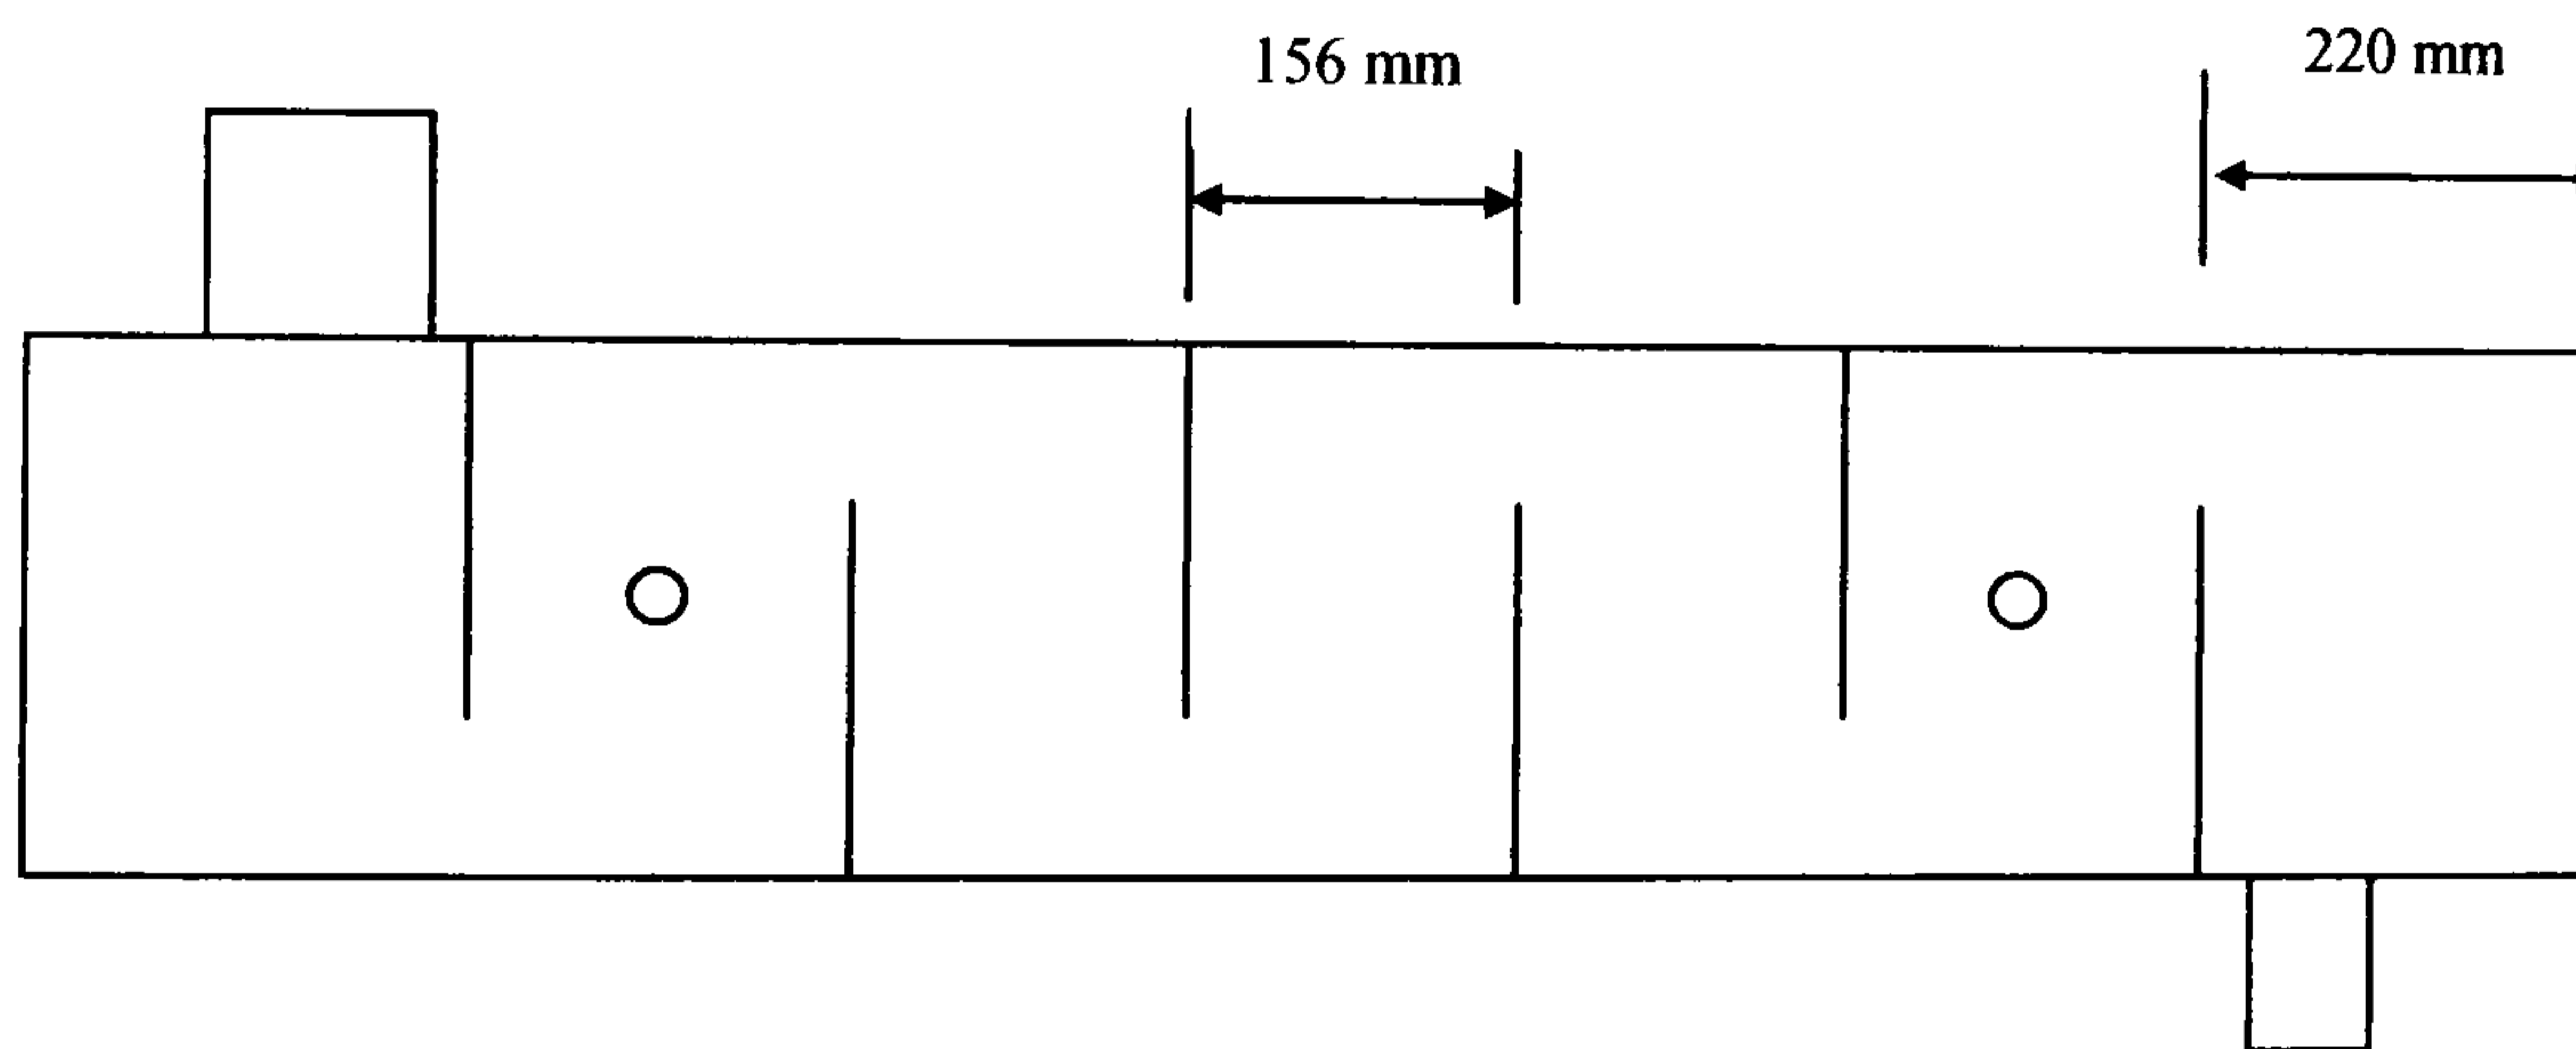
Shellside Baffle Layout - Test 1 (Horizontal Cut)
